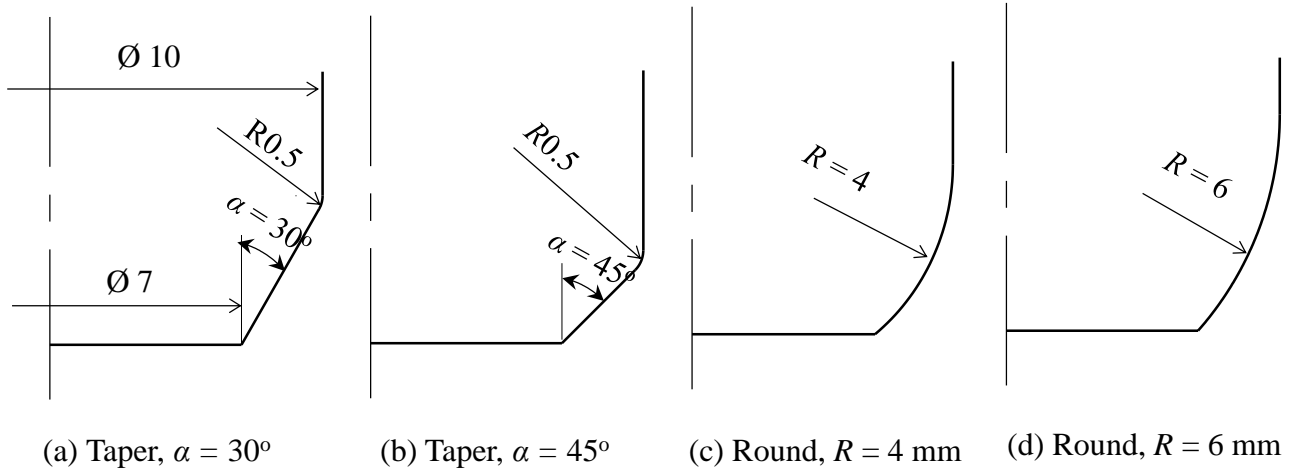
Punches used to thicken hole edge of punched high strength steel sheets.
